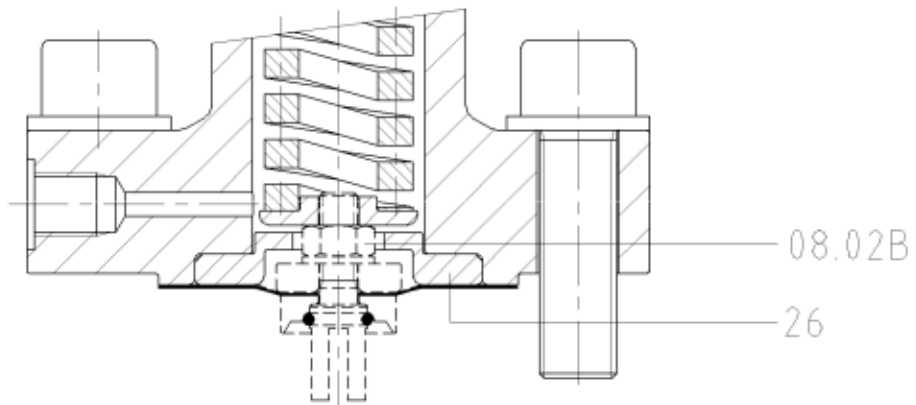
Qty	(Belonging to drawing 08.04)
